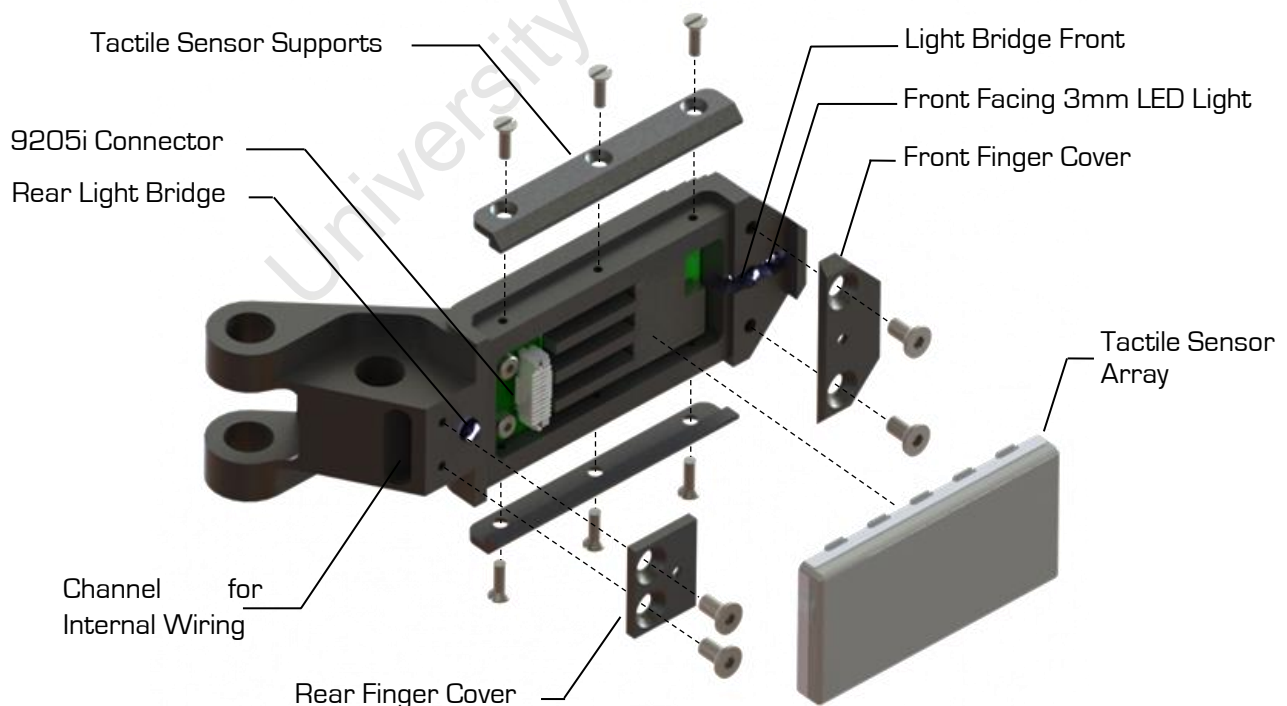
Exploded View of a Gripper Finger with a 9205i Tactile Sensor Array
